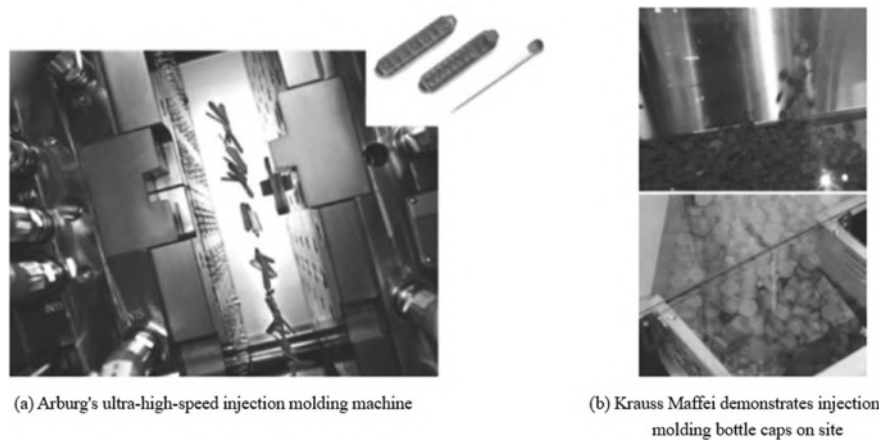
Ultra-high-speed injection molding machine launched at K2013
